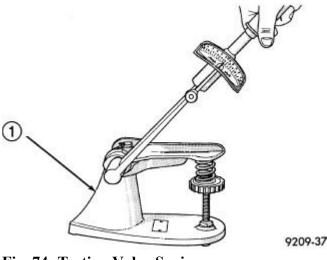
Testing Valve Springs Courtesy of CHRYSLER LLC
